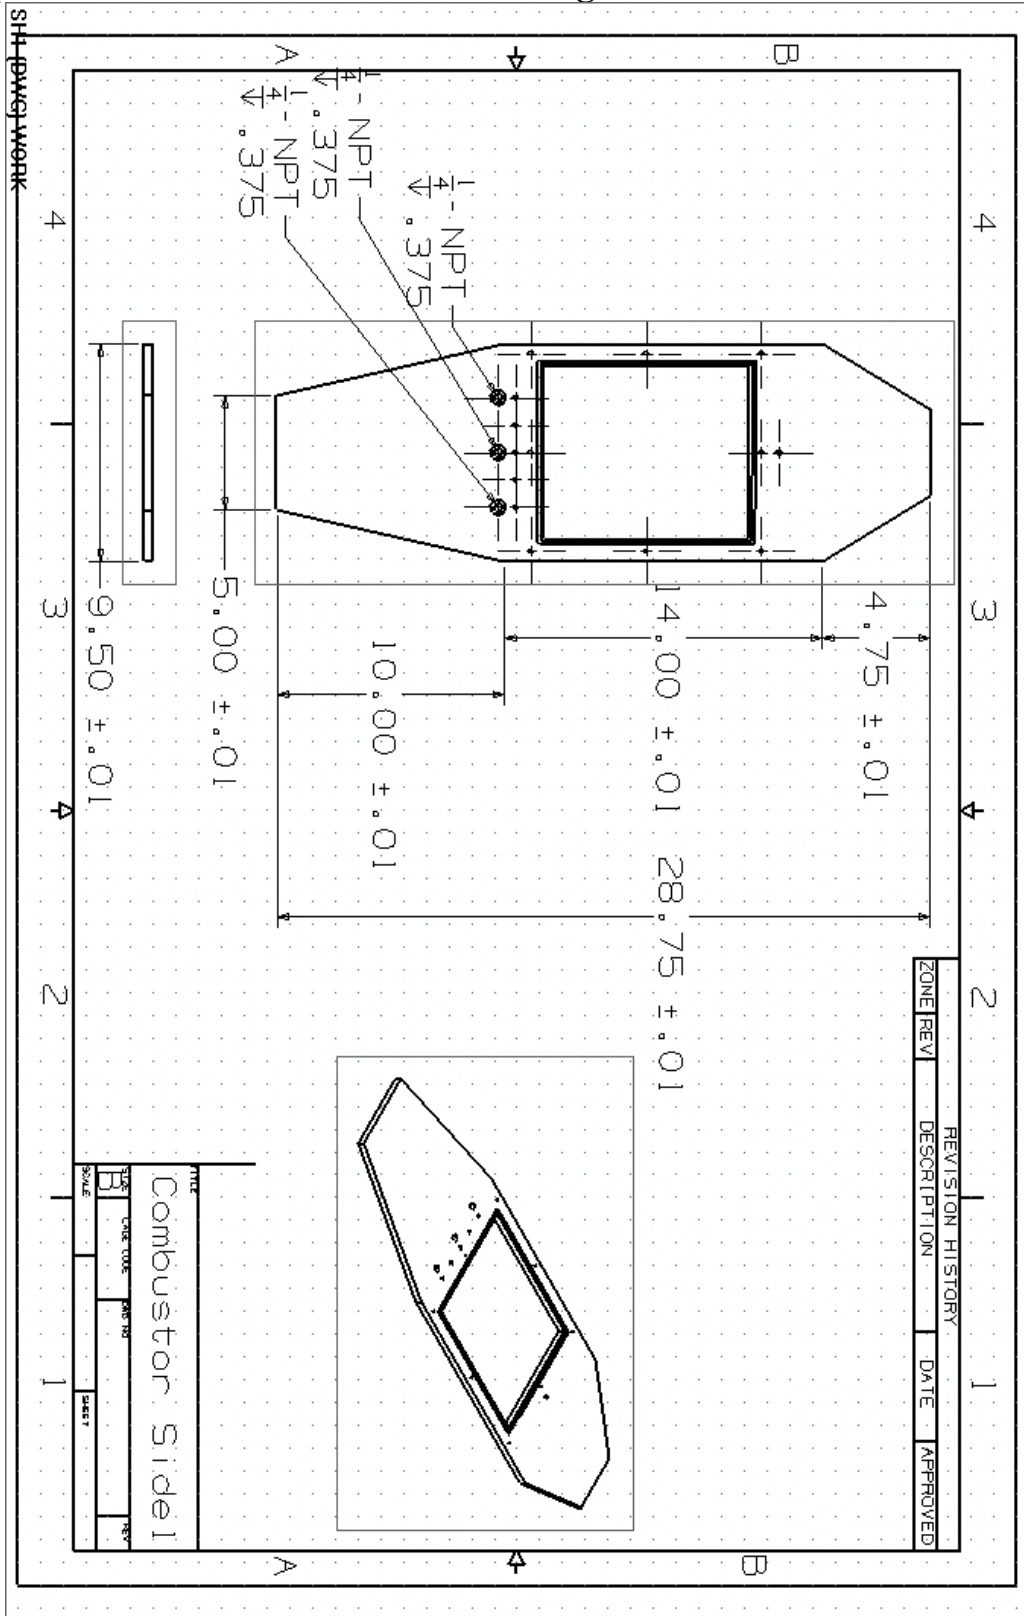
Engineering Drawing of the far side of the Sector Combustor
